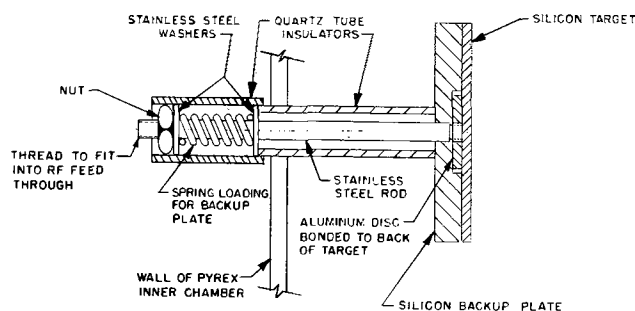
Silicon target assembly using aluminum disk for attachment.
